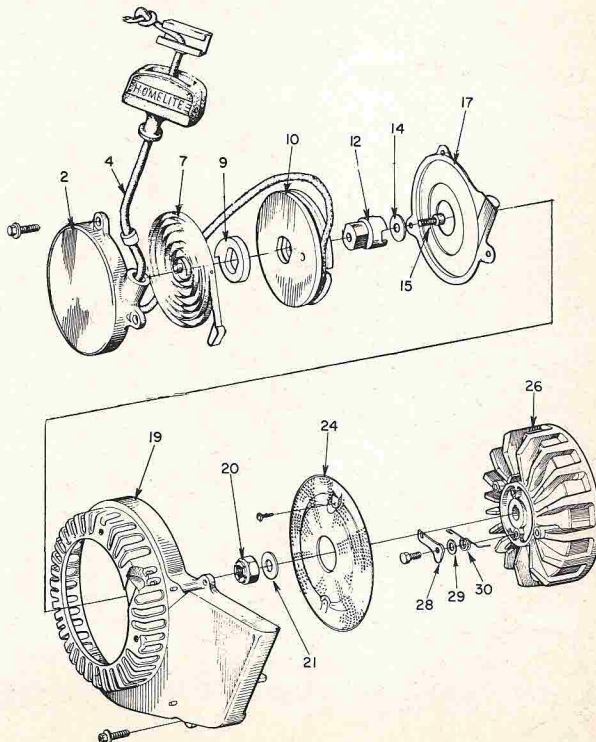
Exploded view of overrunning bearing starter used on models C-51, C-71, C-91, XP-1000 and XP-1100 and early models XP-1020 and XP-1130. Refer to Fig. HL64 for Fairbanks-Morse starter used on models C5, C-7 and C-9 and to Fig. HL66 for ratchet starter used on model XP-1020 automatic and late model XP-1020 and XP-1130 saws.
